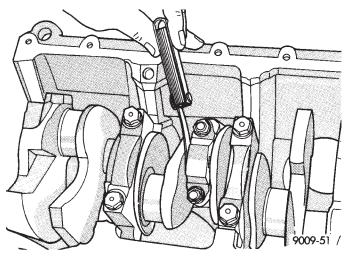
Checking Connecting Rod Side Clearance— Typical
